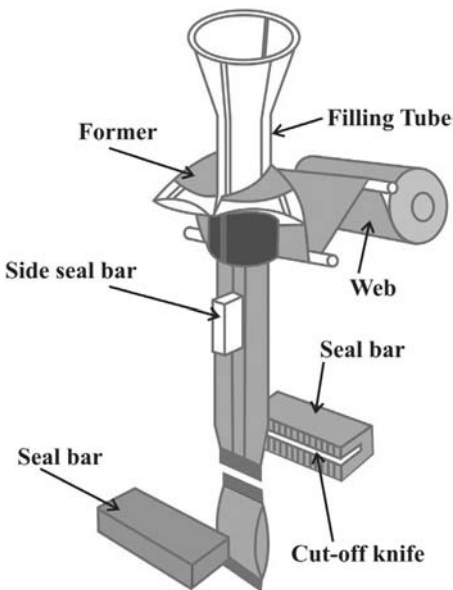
Operation of a vertical-form-fill-seal machine.
